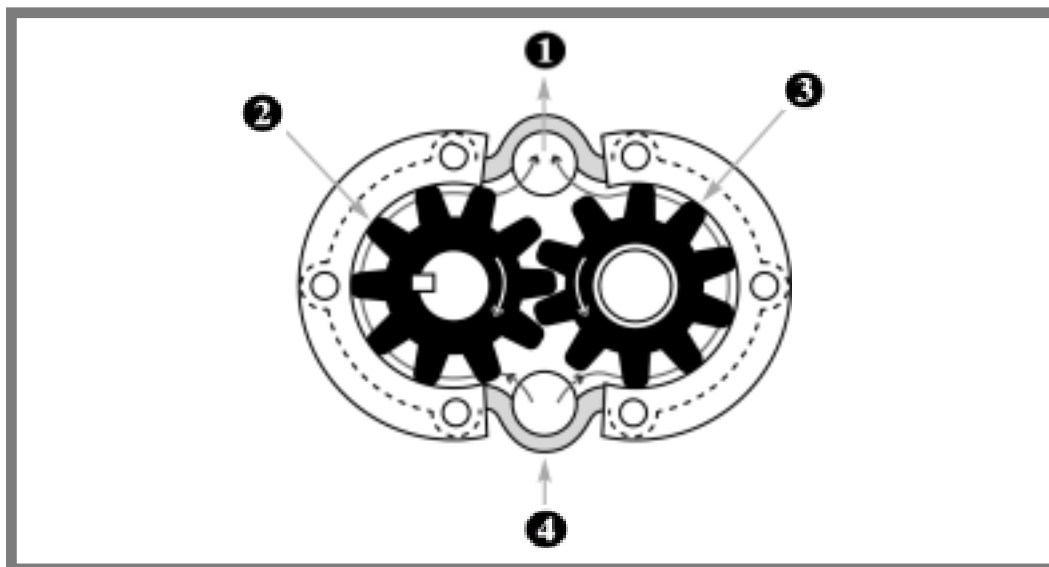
A gear-type oil pump uses a drive gear and a driven gear turning in opposite directions.
